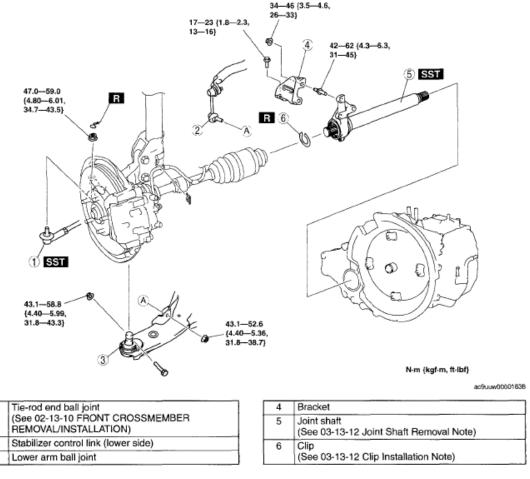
Identifying Joint Shaft Components (2WD) & Torque Specifications Courtesy of MAZDA MOTORS CORP.
